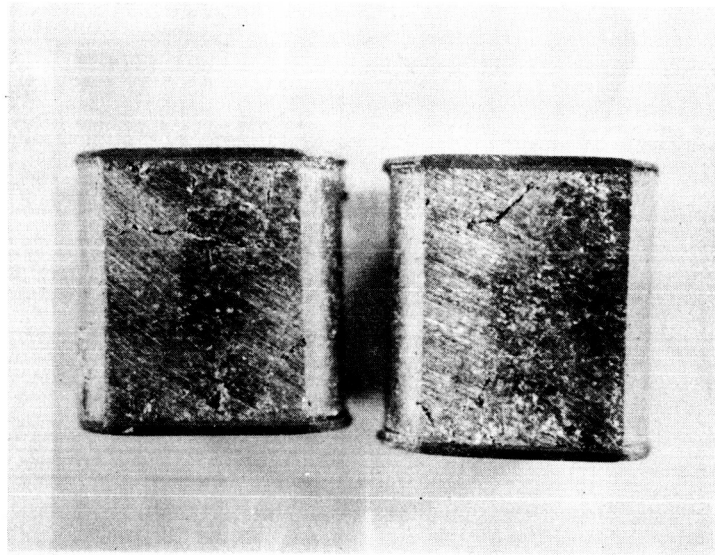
Ten mil Ta electrodes SnTe-brazed on p-type elements. Extensive internal cracking is evident X7.
